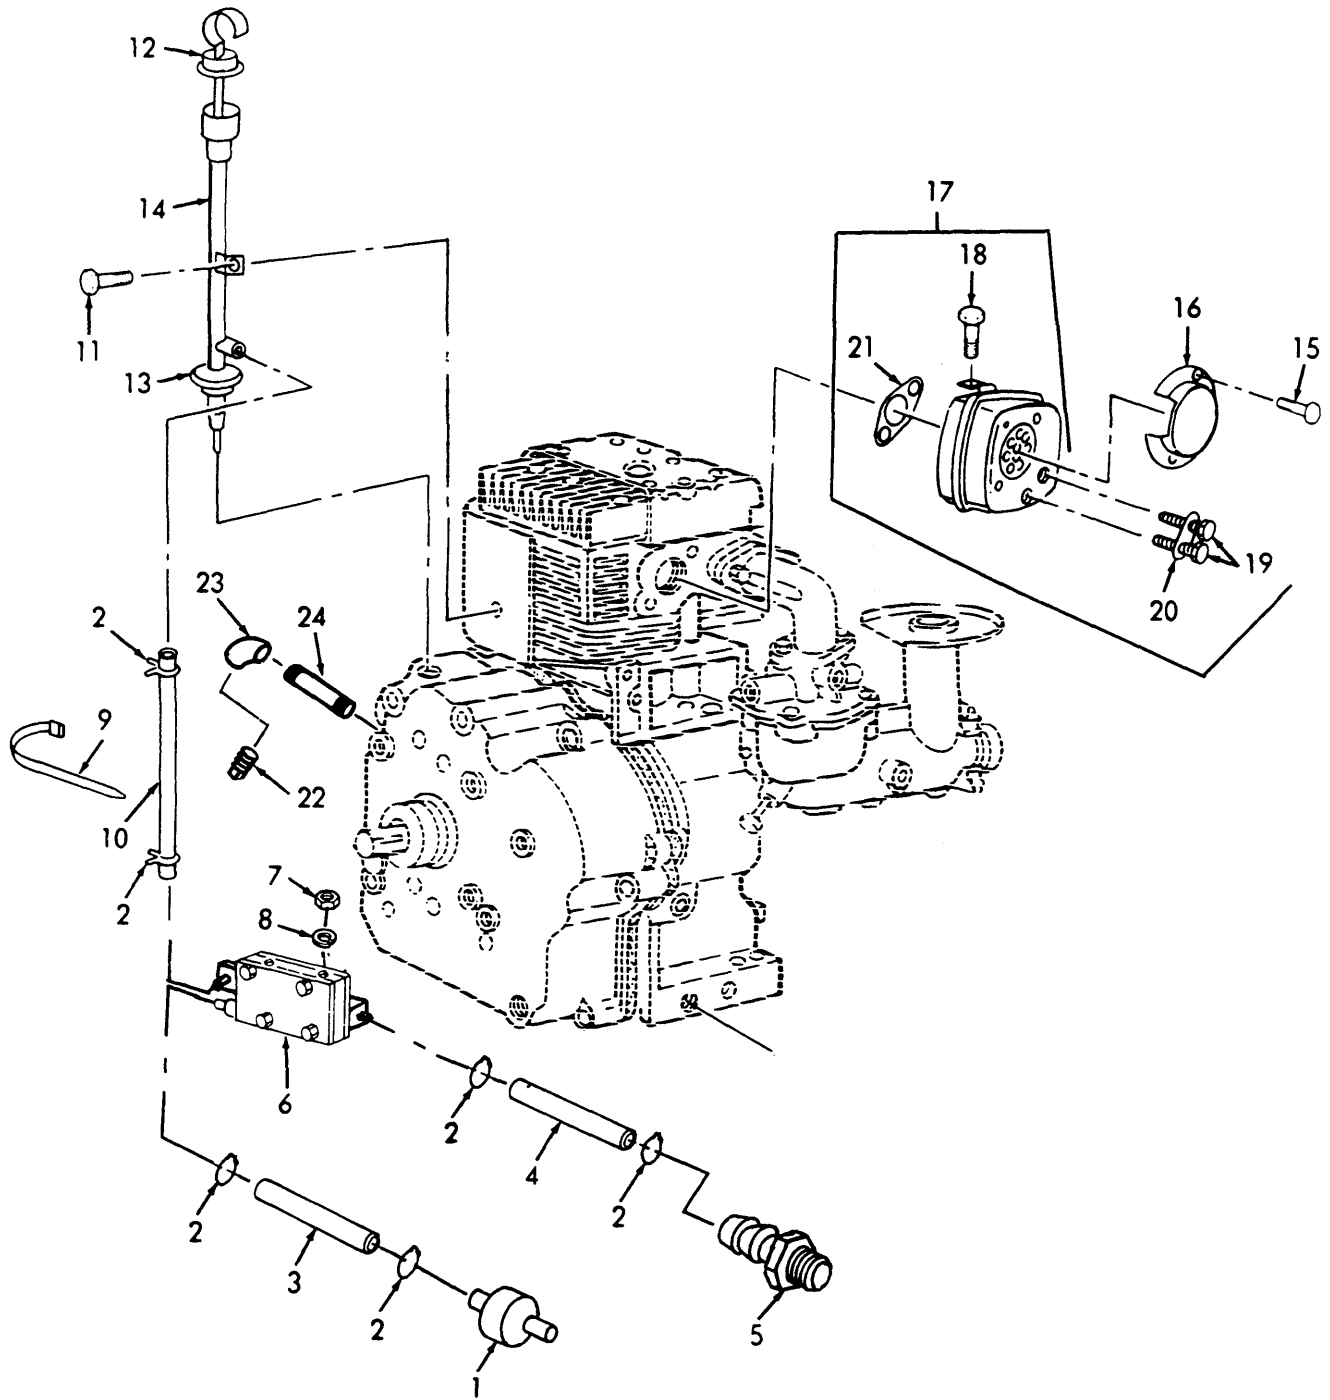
Fuel Pump, Oil Gage Rod, Tube, Drain, and Muffler.
